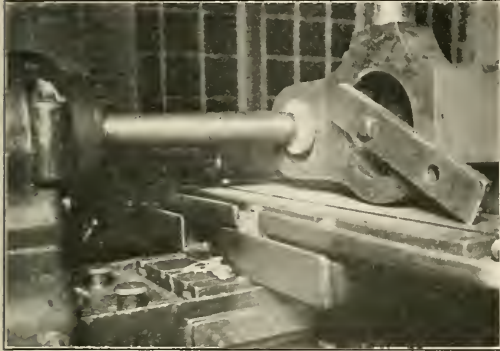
No Machine Equals the Planetary Internal Grinder for Truing Holes
